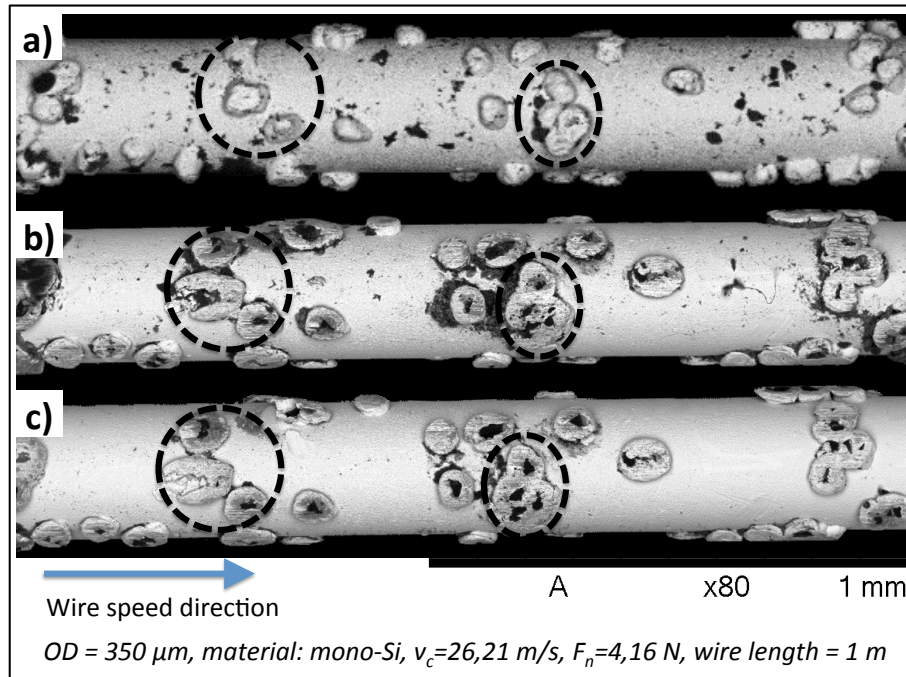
Wear progression of a diamond wire segment: a) new wire, b) after cutting 49 cm^2 , c) after cutting 90 cm^2 .
